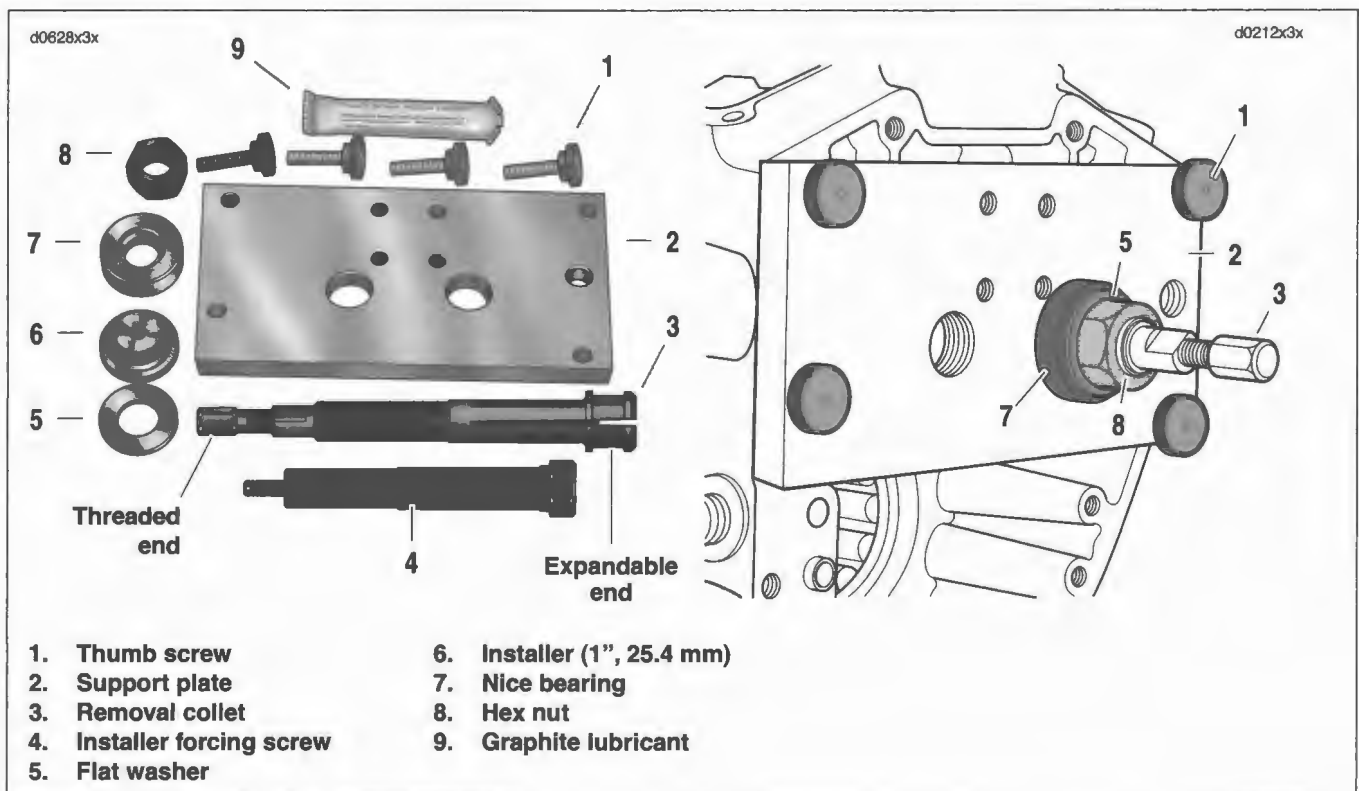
Camshaft Needle Bearing Remover/Installer (Part No. HD-42325)
